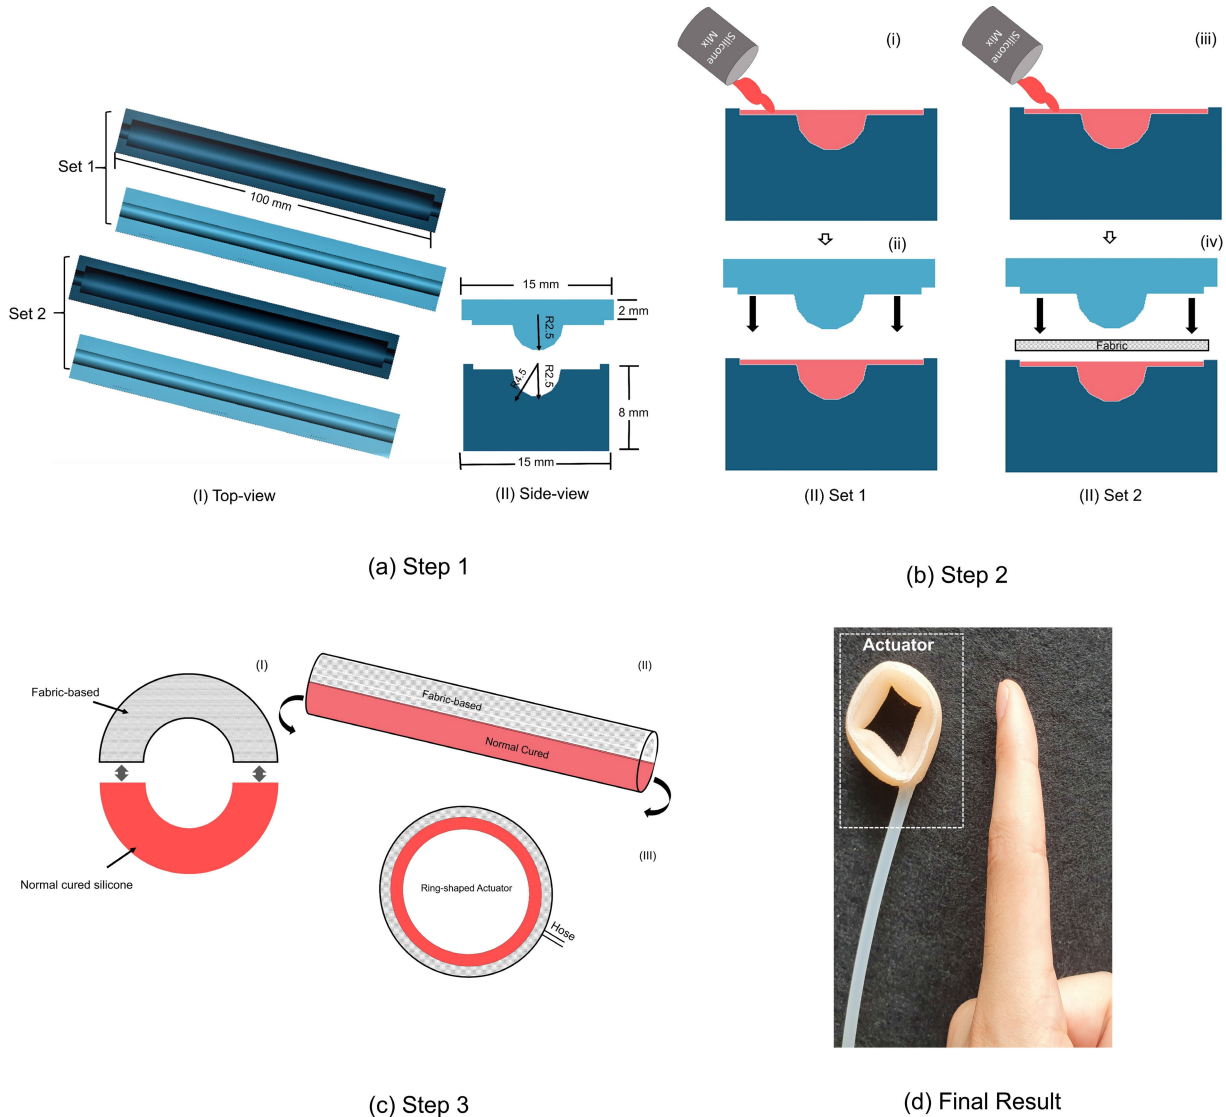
The fabrication process of the actuator: (a) 3D-printed mold sets for two membranes, (b) Step 2: Silicone casting process for stretchable and non-stretchable membranes, (c) Step 3: the process of final assembly; connecting the two splits and inserting the hose, and (d) the final fabrication result where a finger is for size reference.
